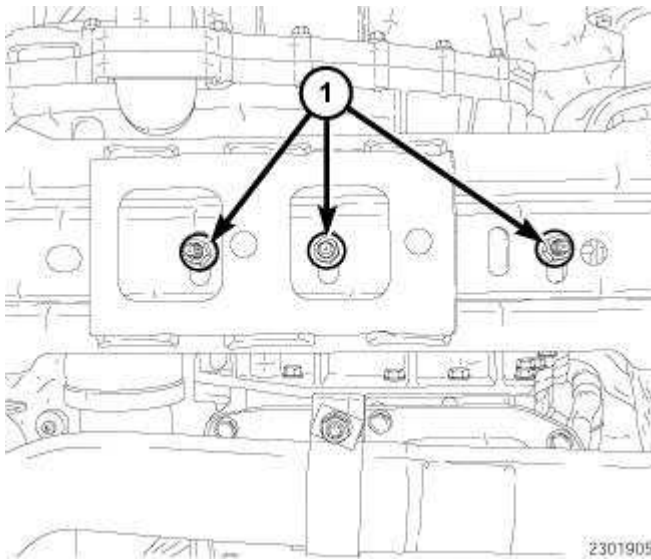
Transmission Mount To Crossmember Retaining Nuts
